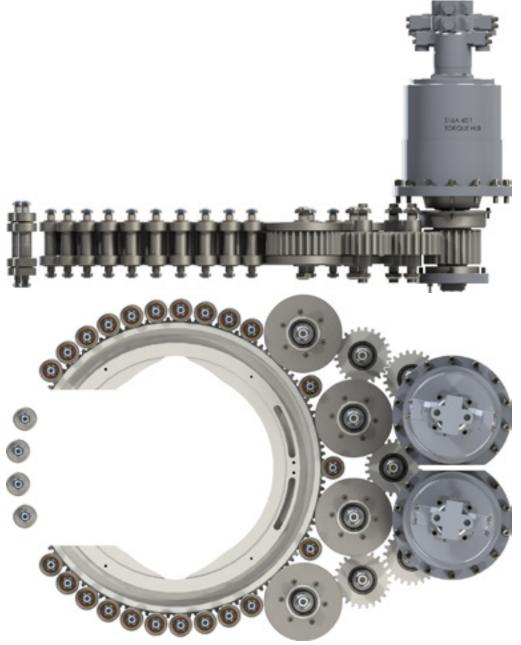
CLE22000XHT-14 Gear Train Top & Side View
